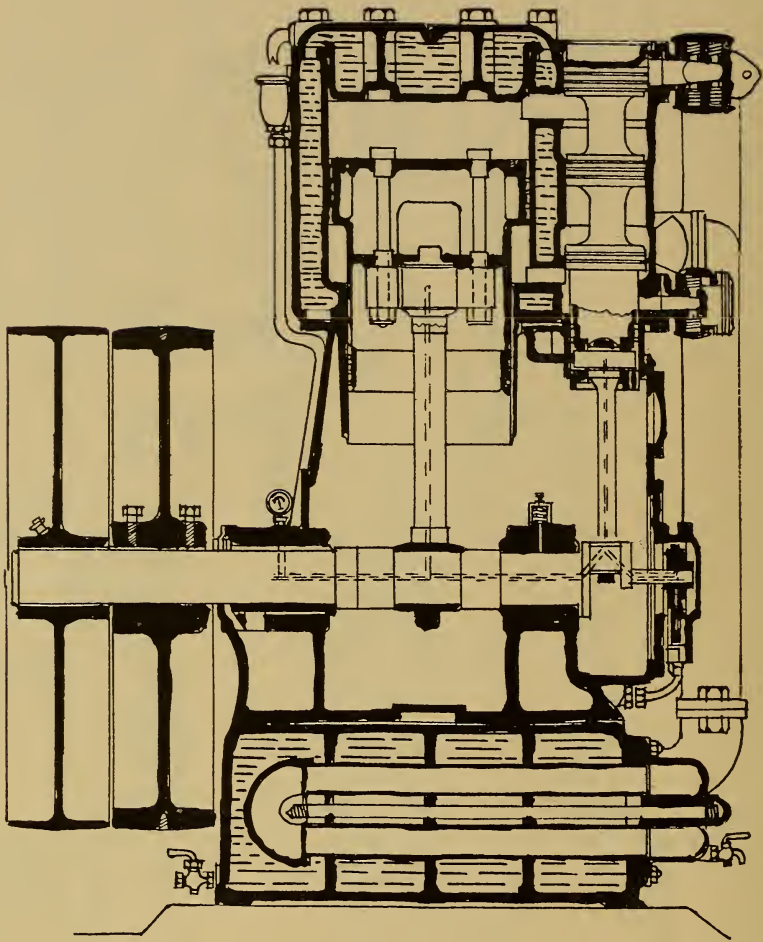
SECTIONAL VIEW OF TWO-STAGE SINGLE-ACTING SENTINEL COMPRESSOR.
